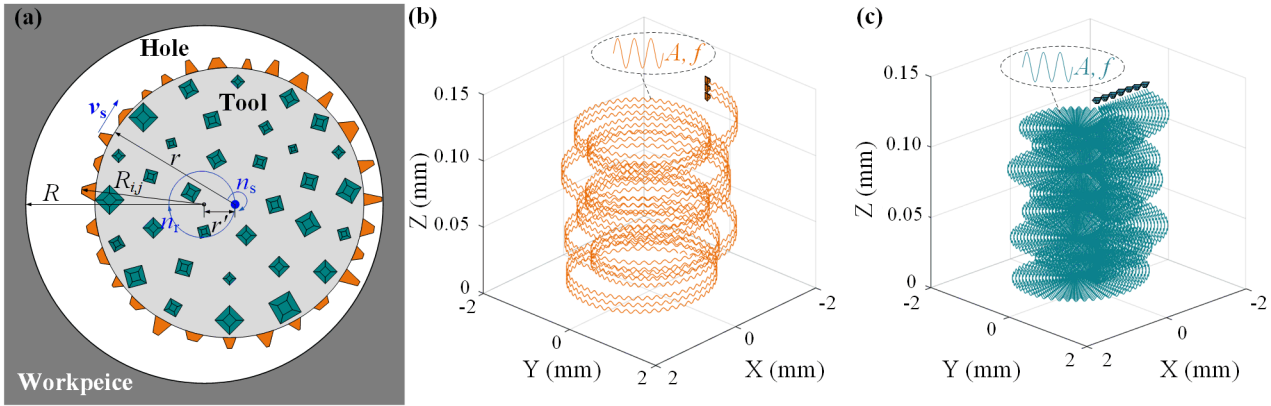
Tool motion in UVHG (a) tool movement in hole grinding; (b) trajectory of side grit; (c) trajectory of bottom grit
